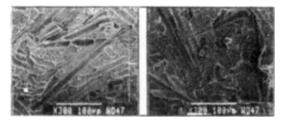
Fractography of PPS weld after fatigue testing
